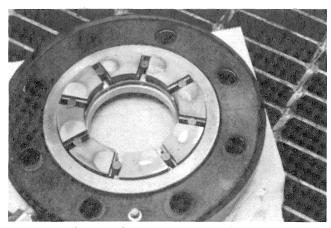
Thrust Pads on Overload with Rotor Deflection at 0.025 in. Taken from HP Barrel Compressor Operating at 10,500 rpm.
